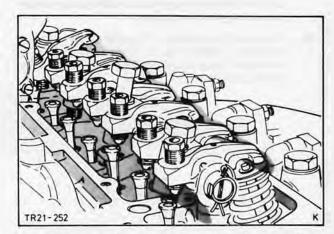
Torque rocker shaft bolts as specified (see Technical Data)
